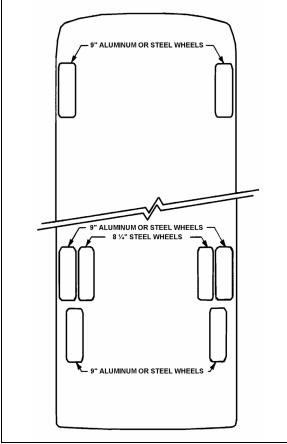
ALUM/STEEL WHEEL ARRANGEMENT 13001
